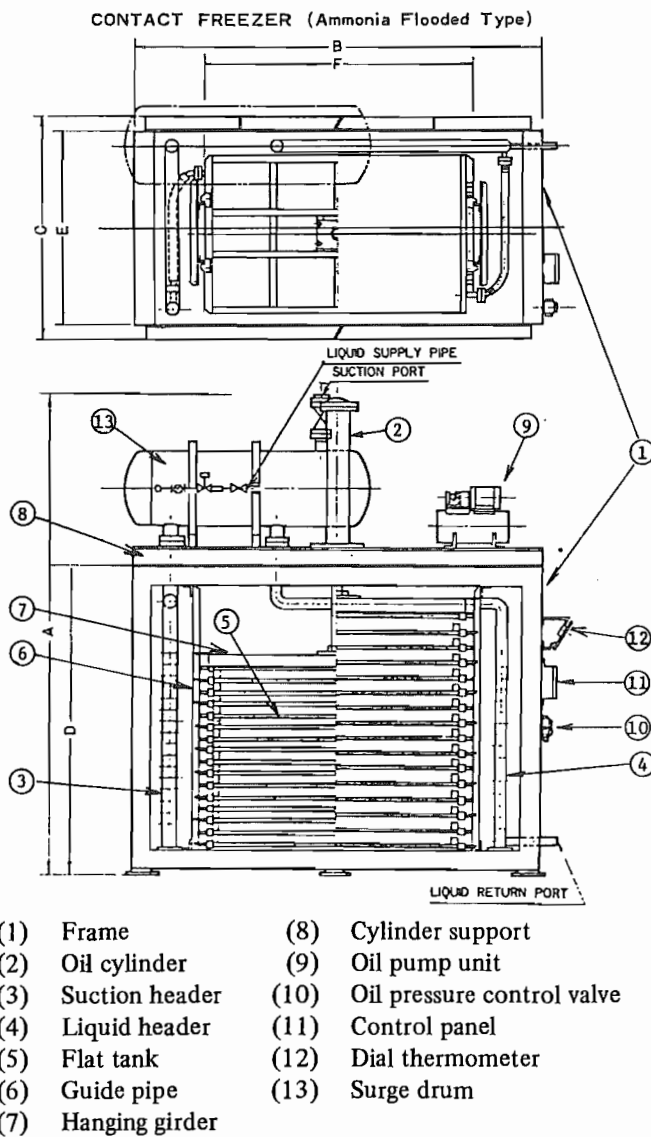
Cross Sectional View and Parts Names of Contact Plate Freezer
